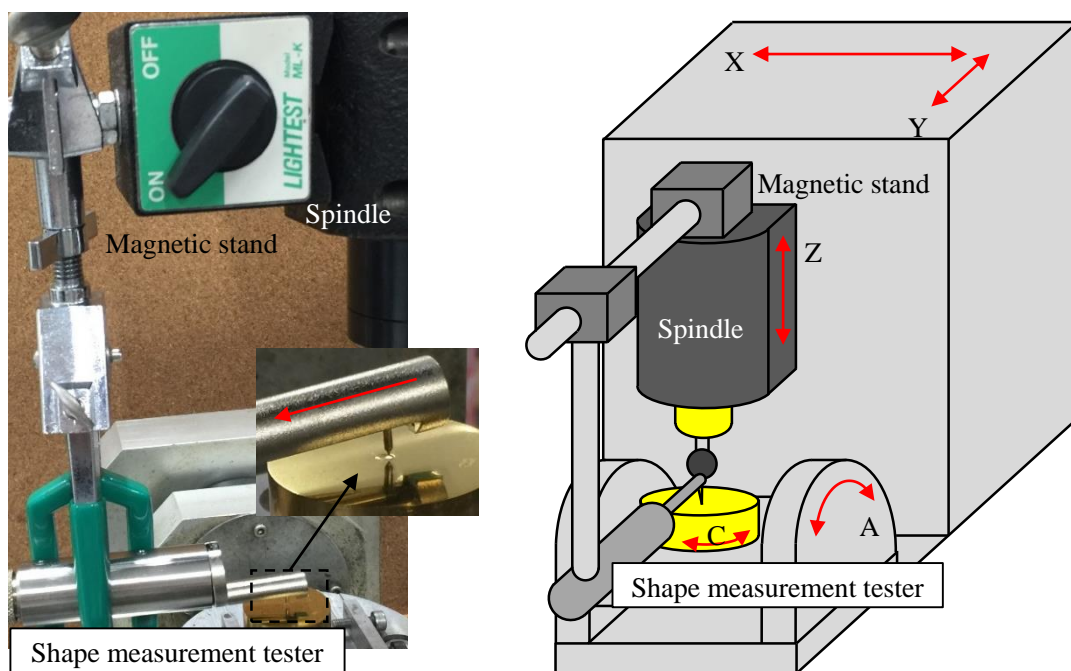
Schematic illustration of shape measurement on machining center.
